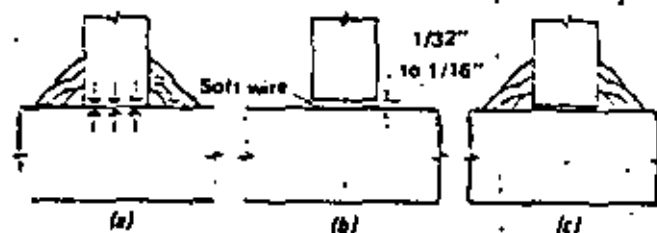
(a) In a restrained joint in thick plates (a), all shrinkage stress must be taken up in the weld. Separating the plates with soft wires (b) allows the plates to move slightly during cooling. The wires flatten (c) and remove most of the stress from the weld metal.
